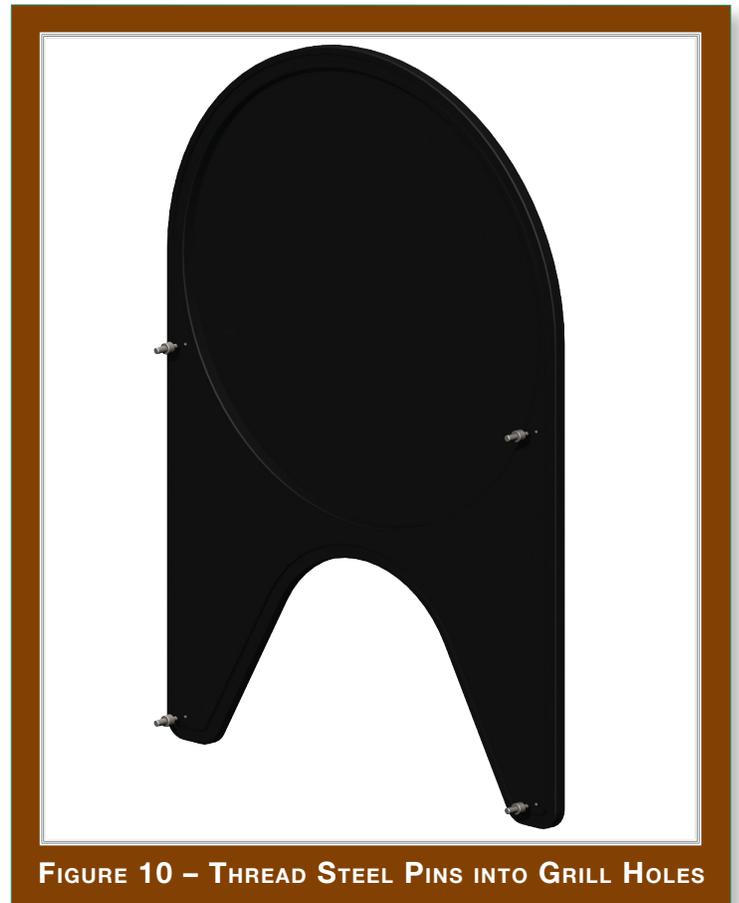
THREAD STEEL PINS INTO GRILL HOLES
